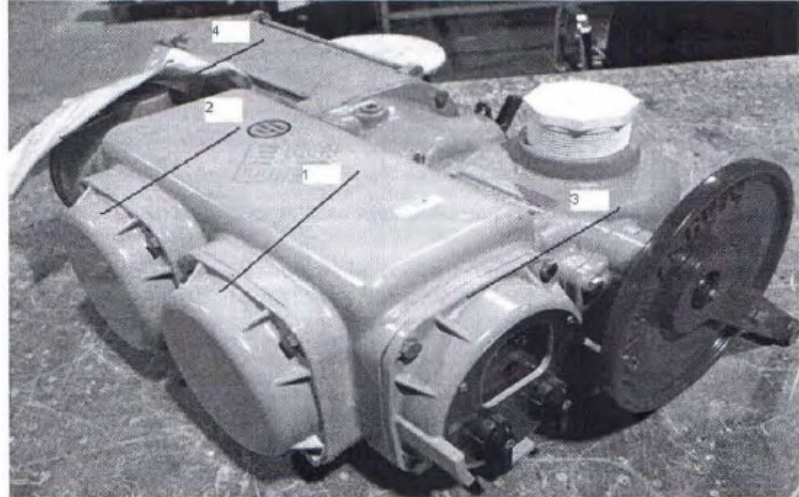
The figure schematically shows the places of explosion-proof joints (covers with the housing)
